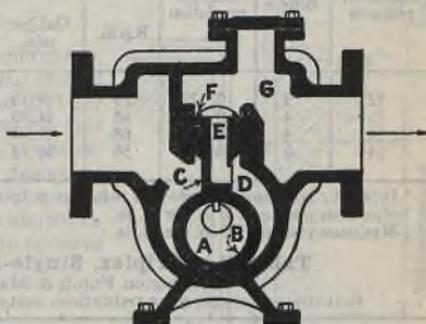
Single impeller rotary pump with plunger or reciprocating blade.
